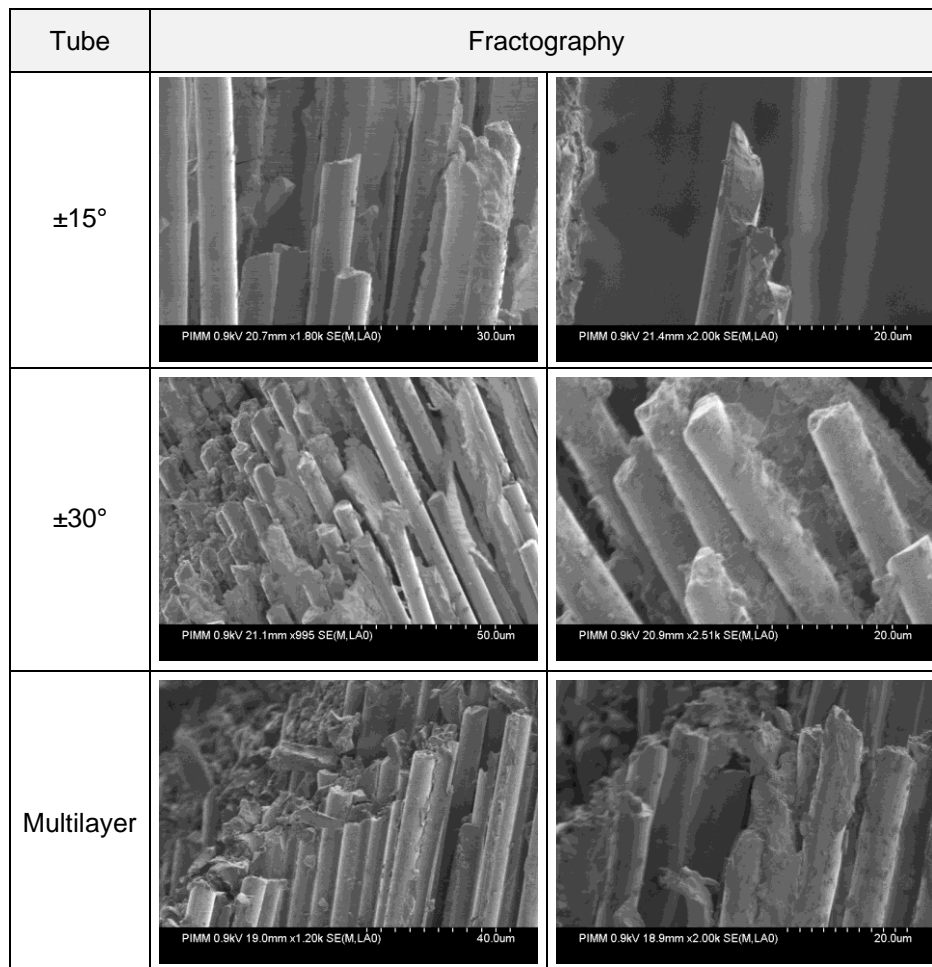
Microscopic analysis of fracture surfaces
